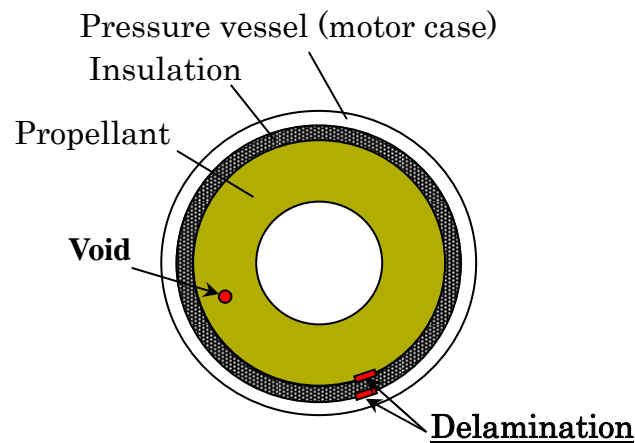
Cross-section shape of solid rocket motor and critical flaw
